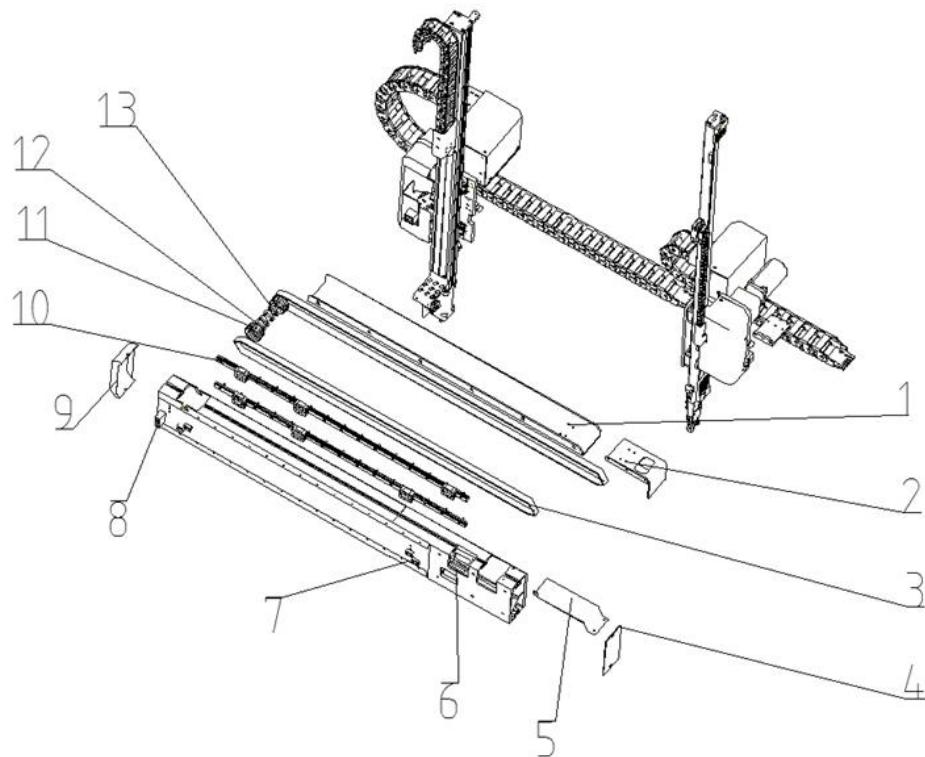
ST5 crosswise unit(single-stage arm) exploded view
